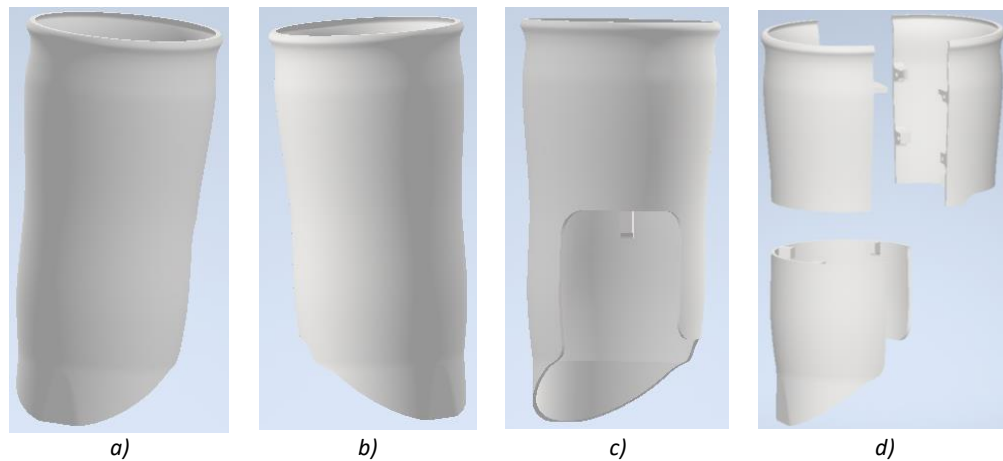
Thigh Cover – a) Front Left Perspective; b) Front Right Perspective; c) Back Left Perspective; d) Exploded View
